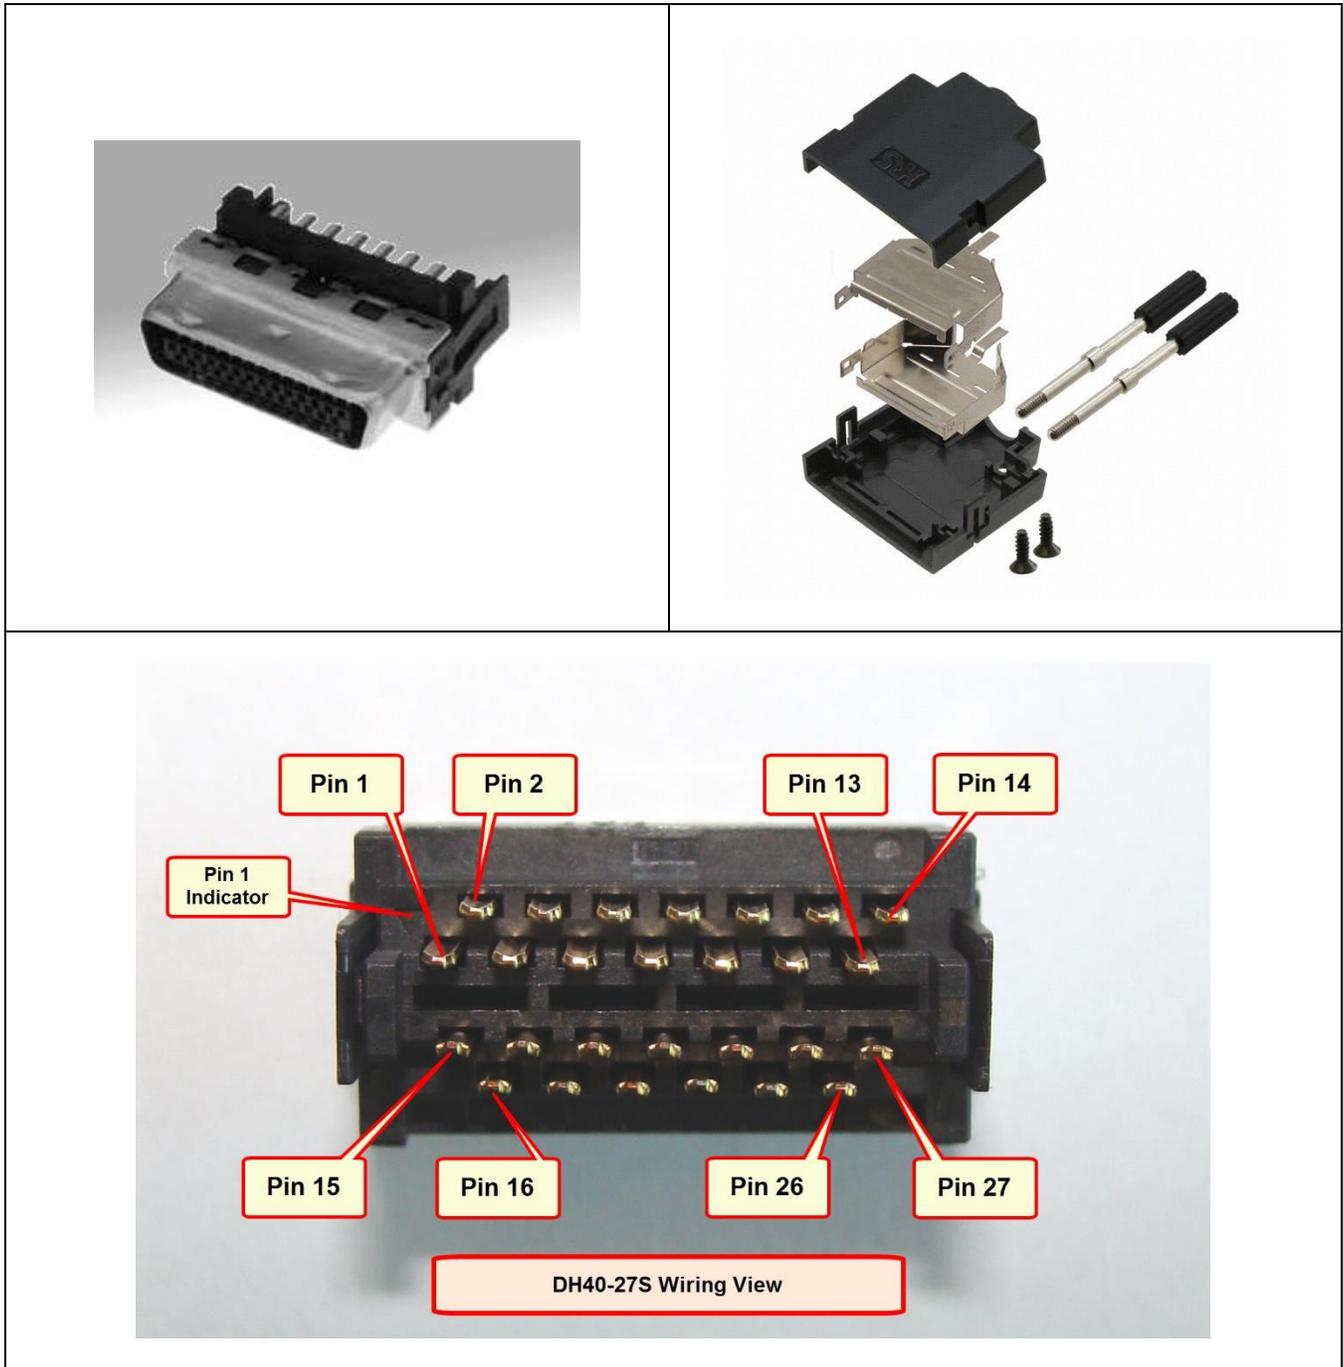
OR-YXCC-H270000 Custom Wiring Kit
